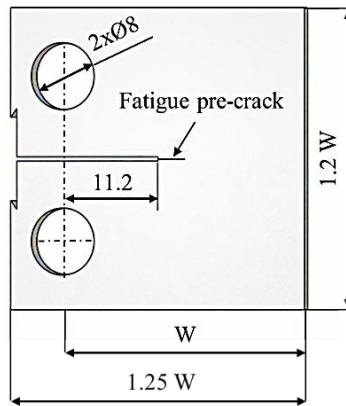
C(T) specimen geometry used for J-integral measurements ($W = 32$ mm).
